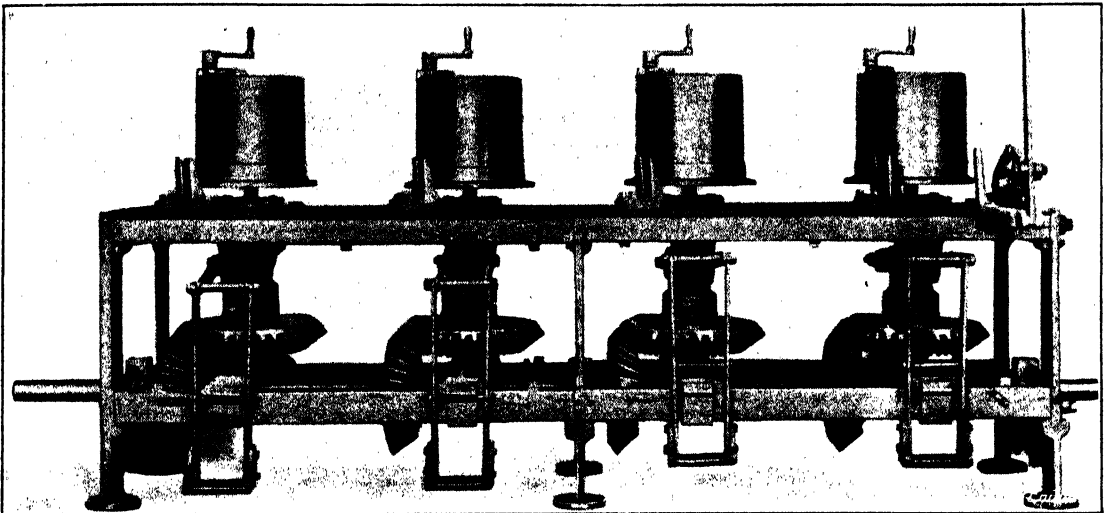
12 IN. DIAMETER WIRE-DRAWING BLOCKS—G. CROSSLEY.
